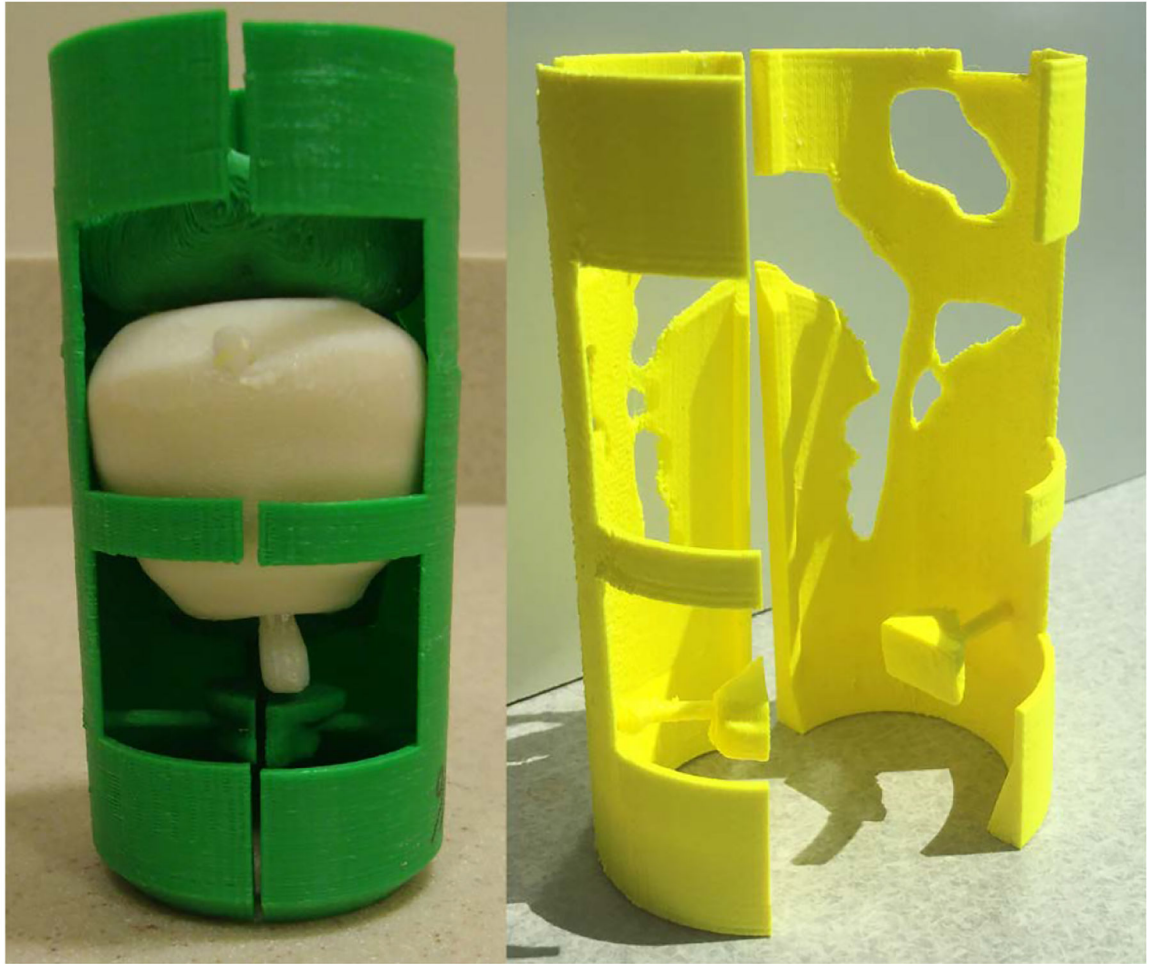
Printed prototype of the imaging model, version 5 which prints as separate parts and must be assembled with its frame
